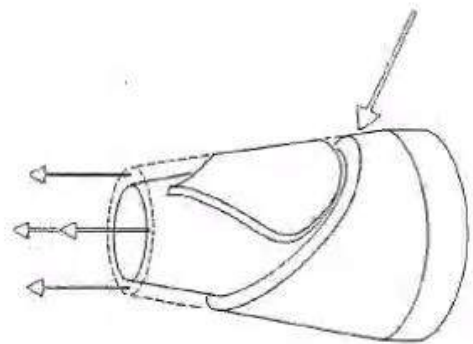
Mandrel of a side-fed die with a heart-shaped manifold (principle)
